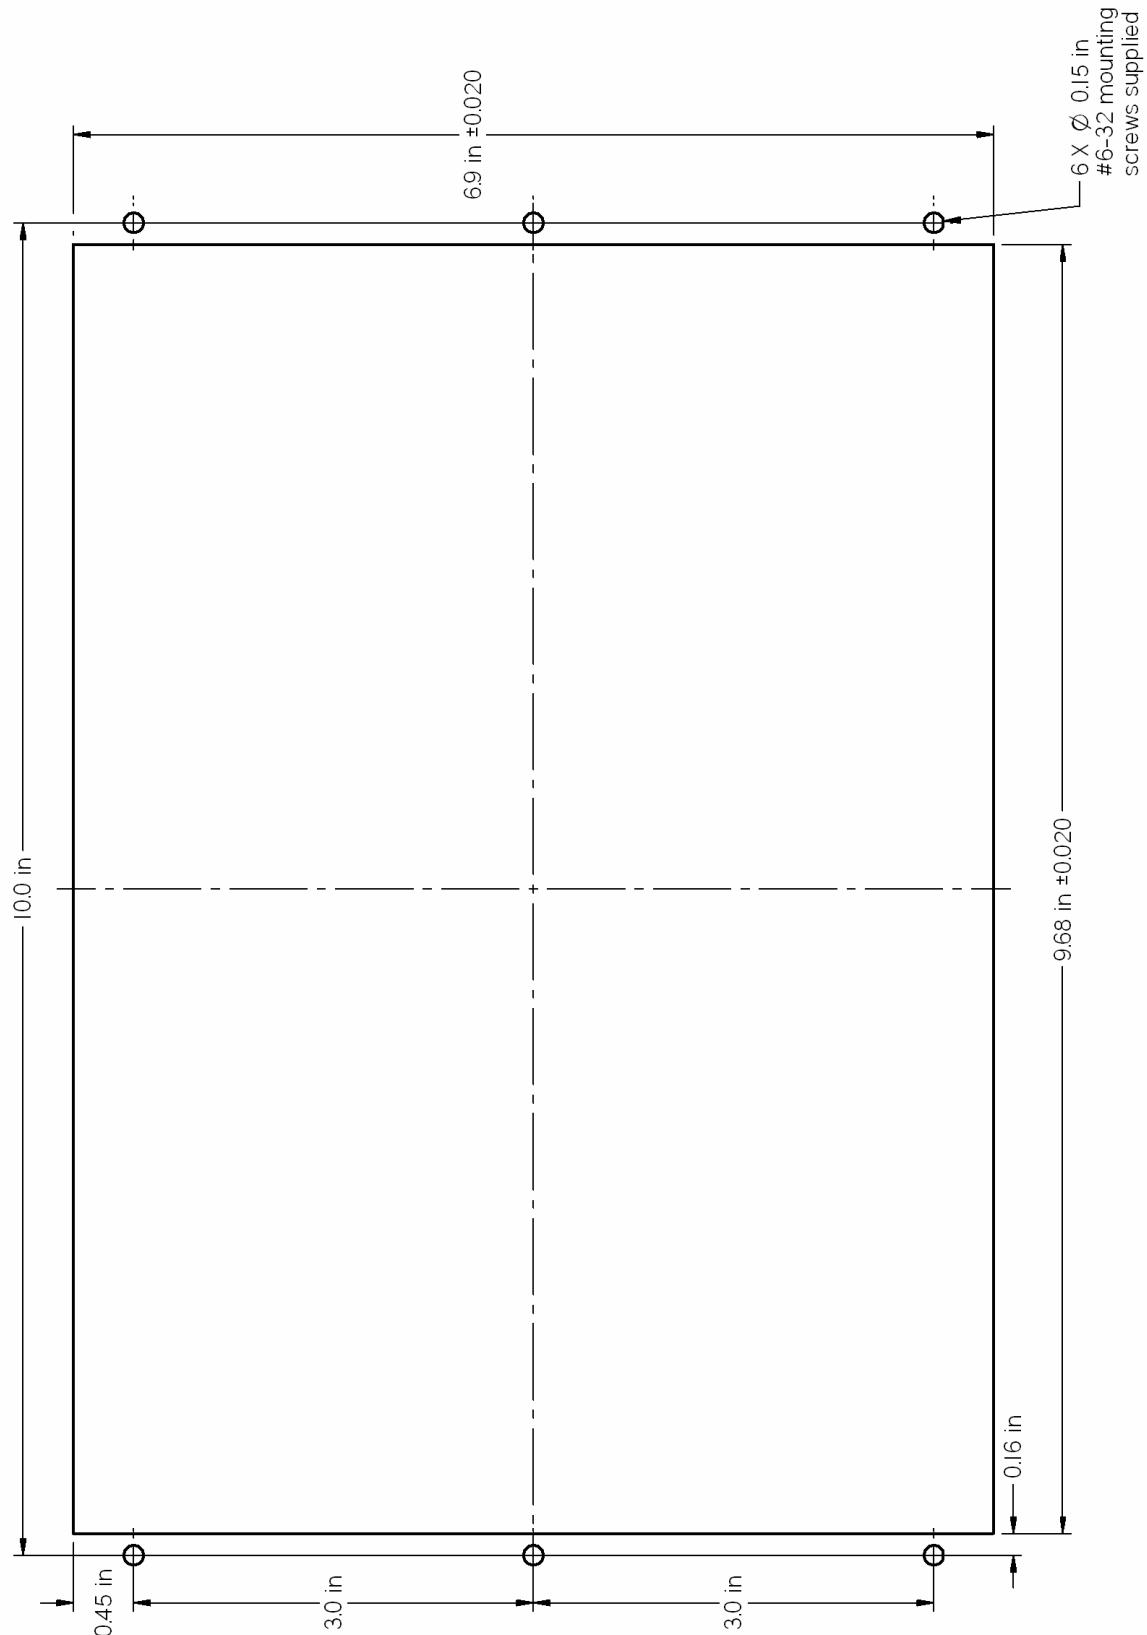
SV-D1000 Panel Cutout and Mounting Hole Dimensions – NOT ACTUAL SIZE
